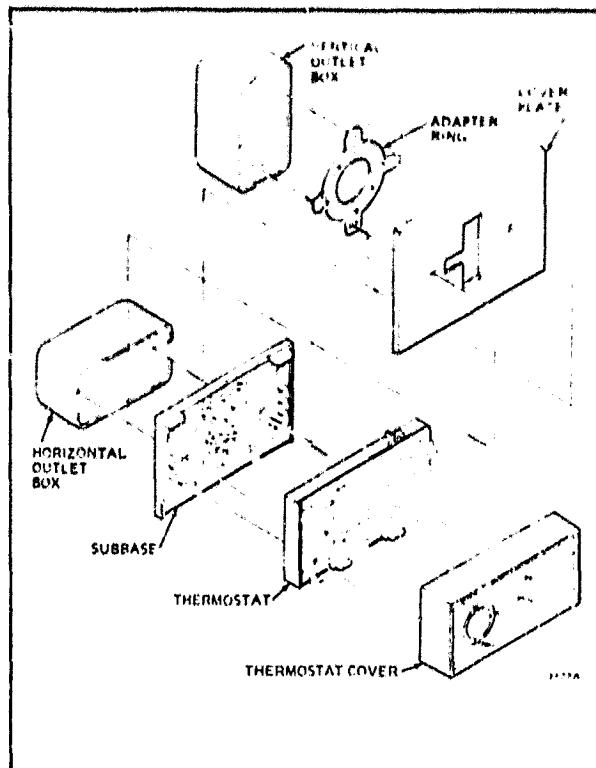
INSTALLATION OF Q672 SUBBASE ON OUTLET BOX.
